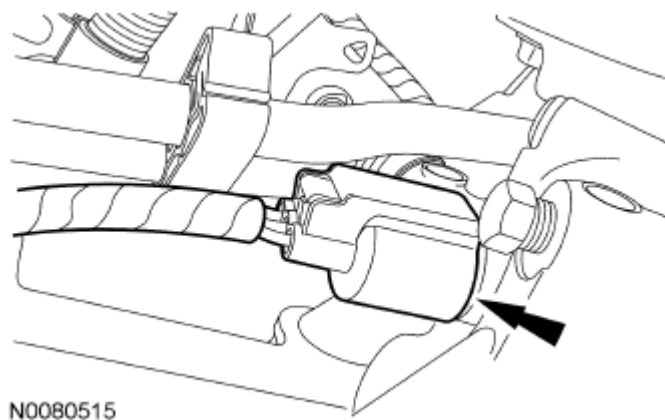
Locating Turbine Shaft Speed Sensor Electrical Connector
